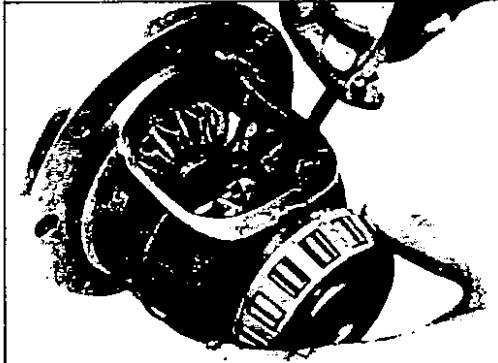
Measuring the clearance between the differential side gear and thrust washer.
